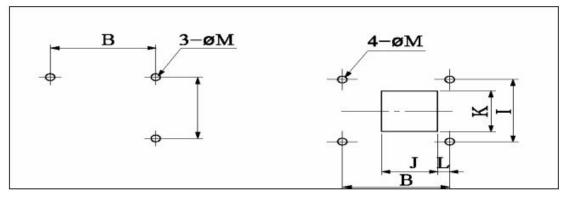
Figure I . Fixing Bolt Hole (Front) Figure II . Fixing Bolt Hole and Panel Hole (Back)
